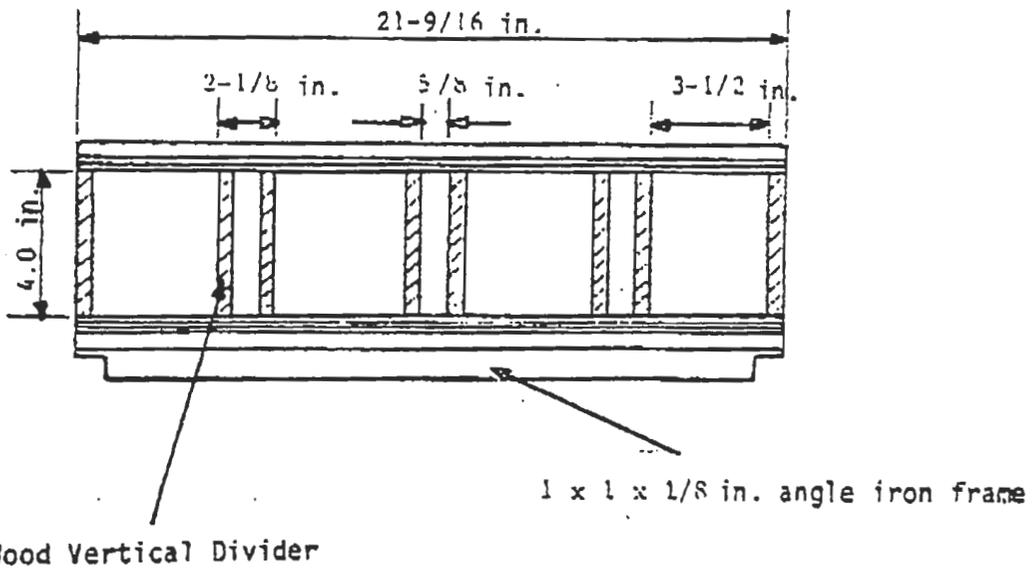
Typical ETR Fuel Element Storage Rack Shelf Insert
